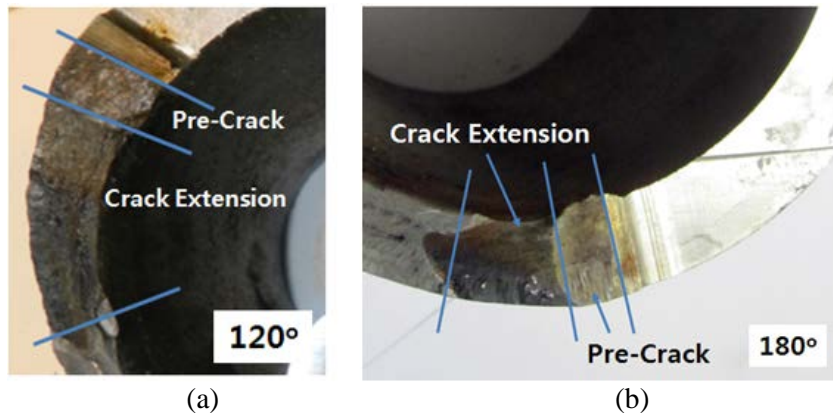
Fracture appearances of welded pipes after J-R tests
